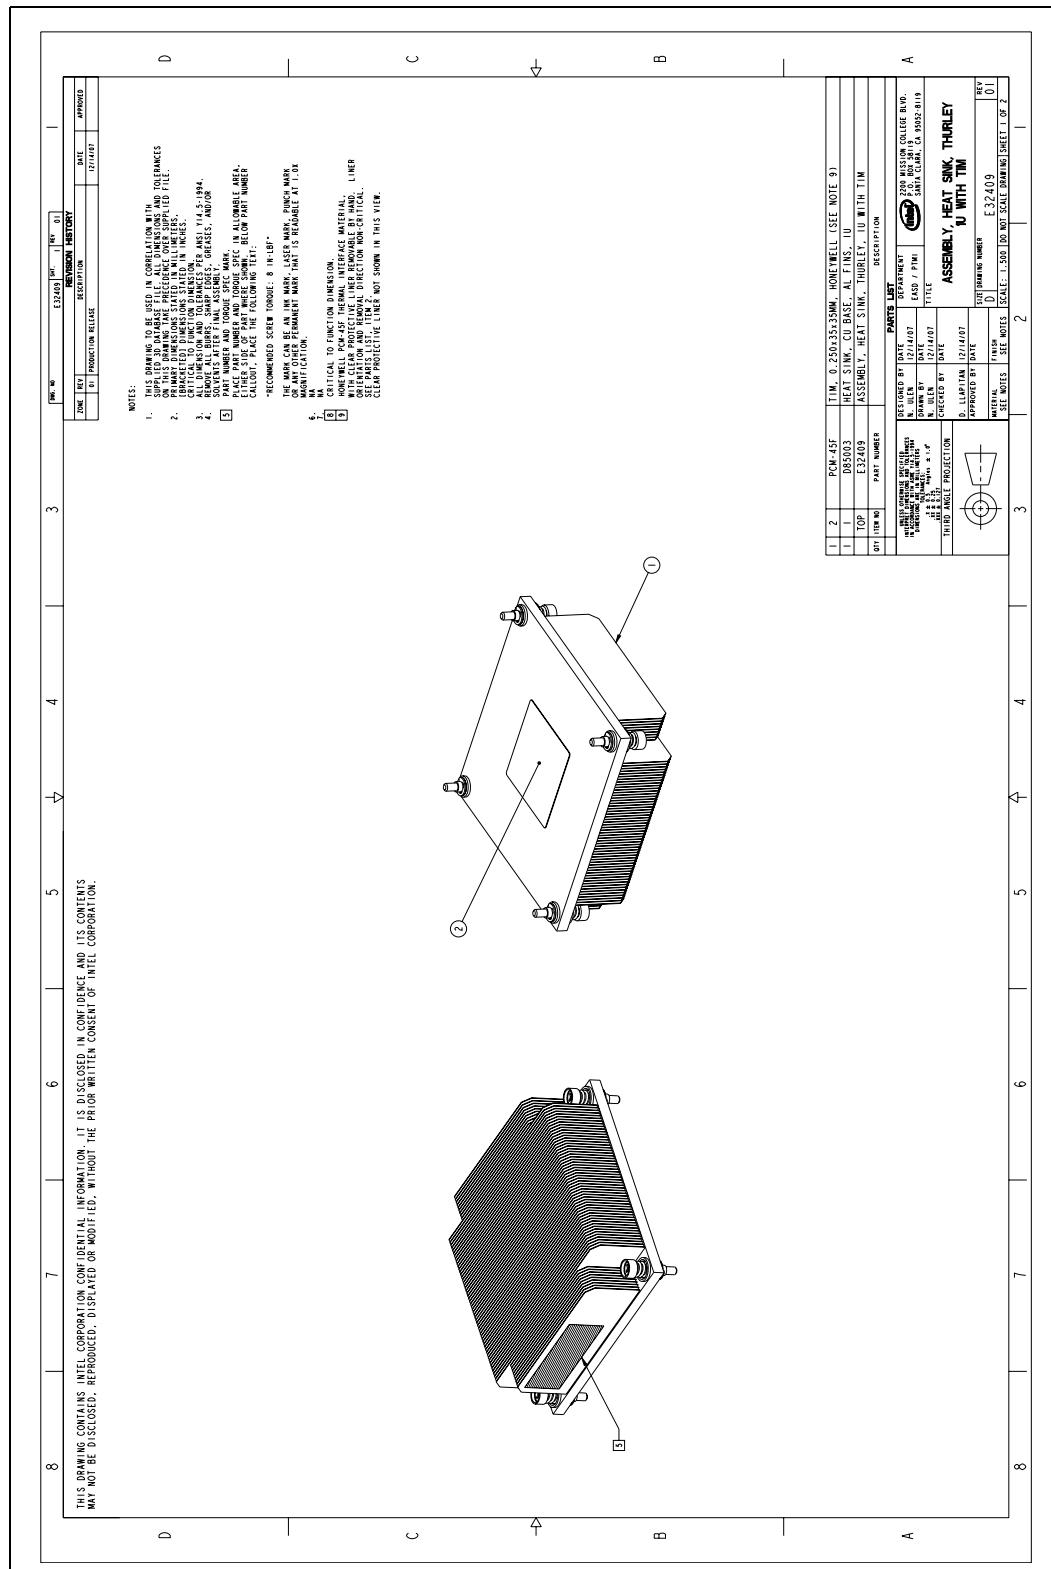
1U Reference Heatsink Assembly with TIM (Sheet 2 of 2)
